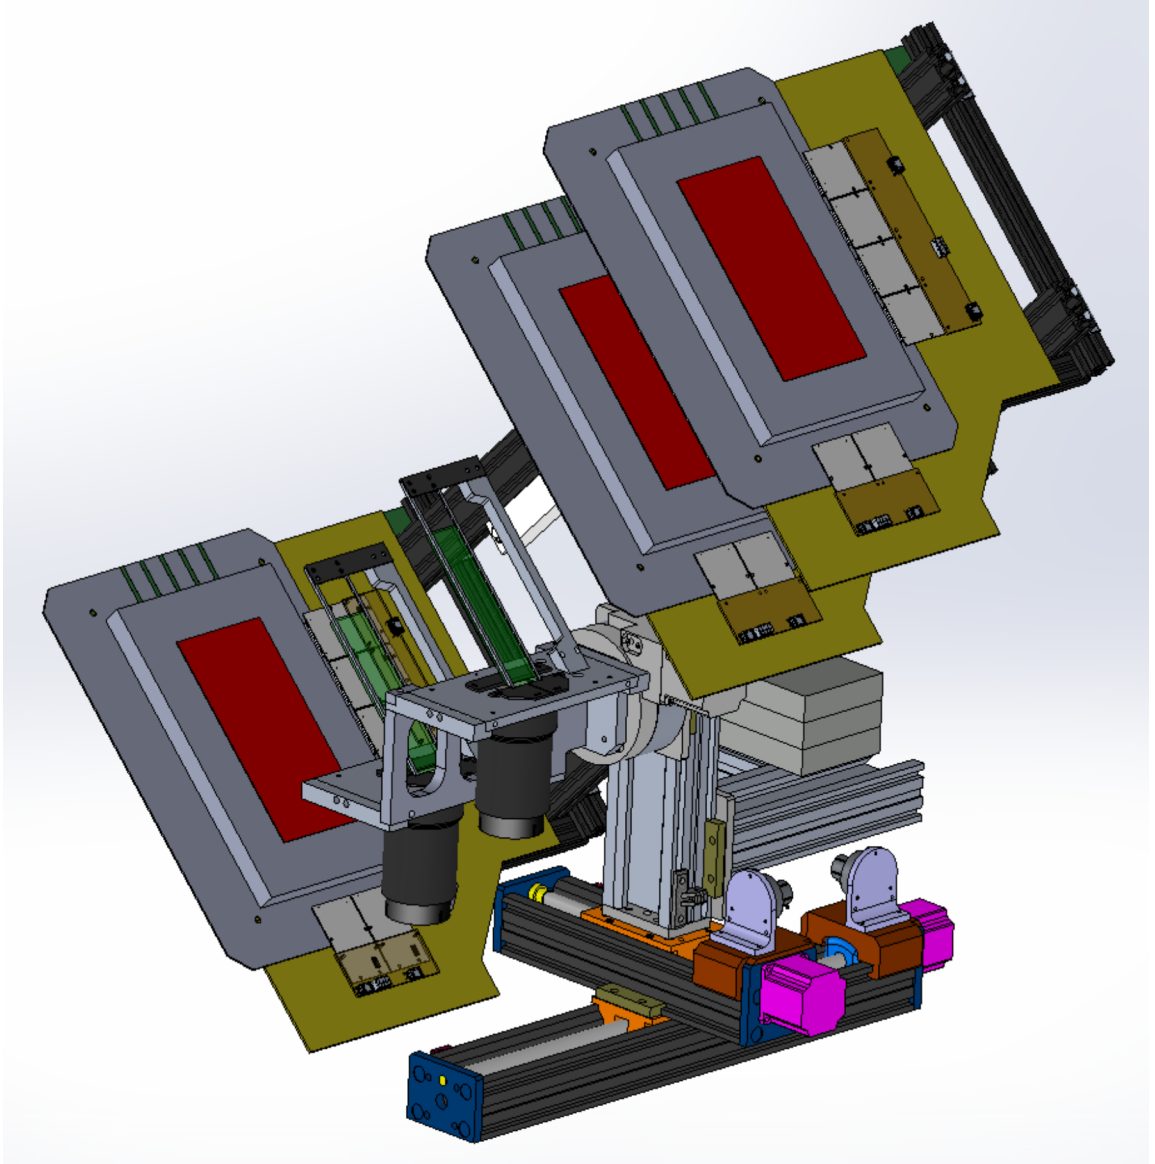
PREX-II/CREX RHRS detector package CAD. Many details are present, including rough outlines of the GEM electronics, the linear position transducers (light purple-colored sitting atop the linear sliders near the motors), and counter weight assembly. All details needed to be included in order to balance the package and ensure weight and torque tolerances of the sliders were not exceeded. The primary framing component is series-10 extruded aluminum.
